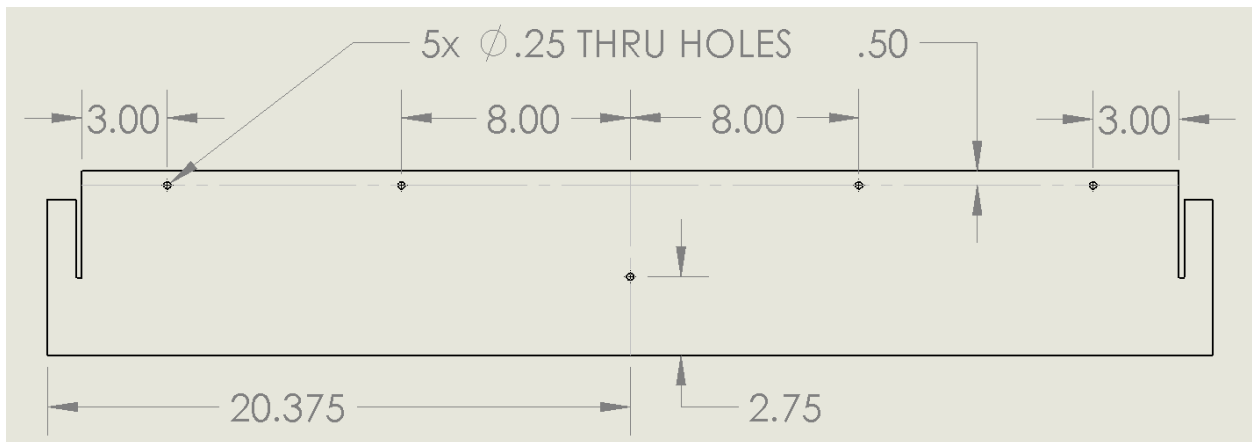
Sandbox Bed Long Wall Suggested Bolt Hole Pattern
